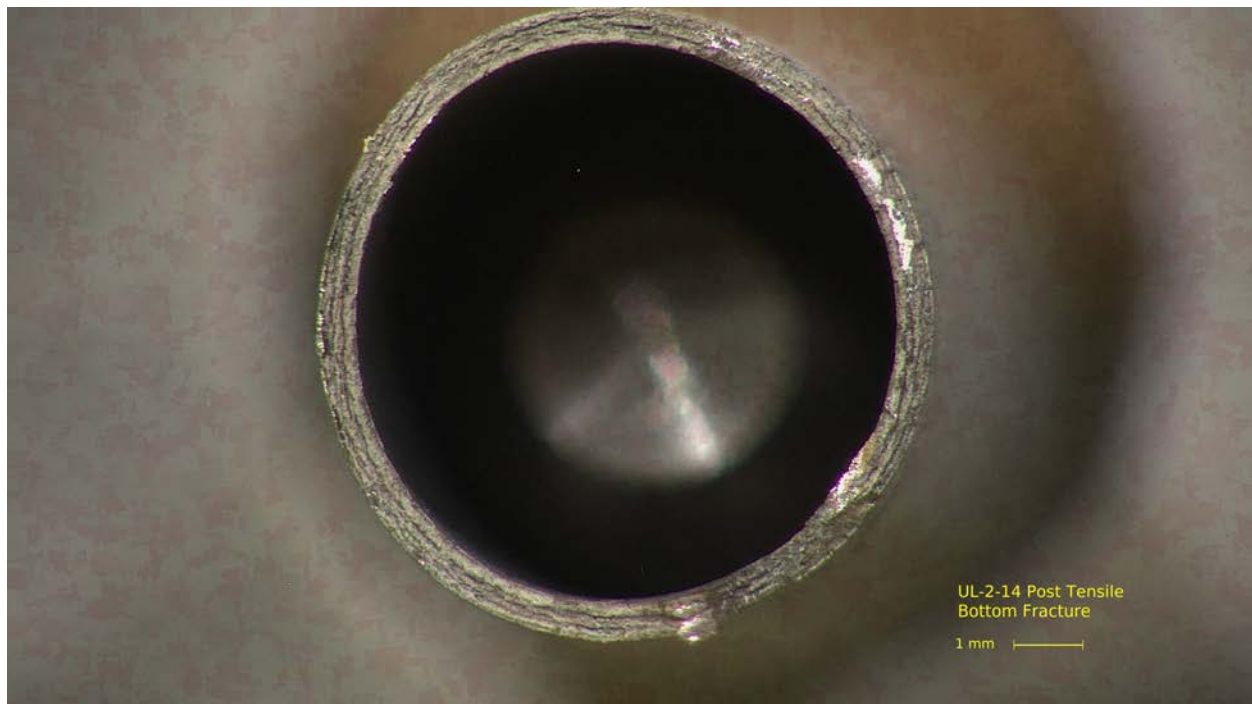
Post-Tensile Image Bottom Fracture for UL-2-14
